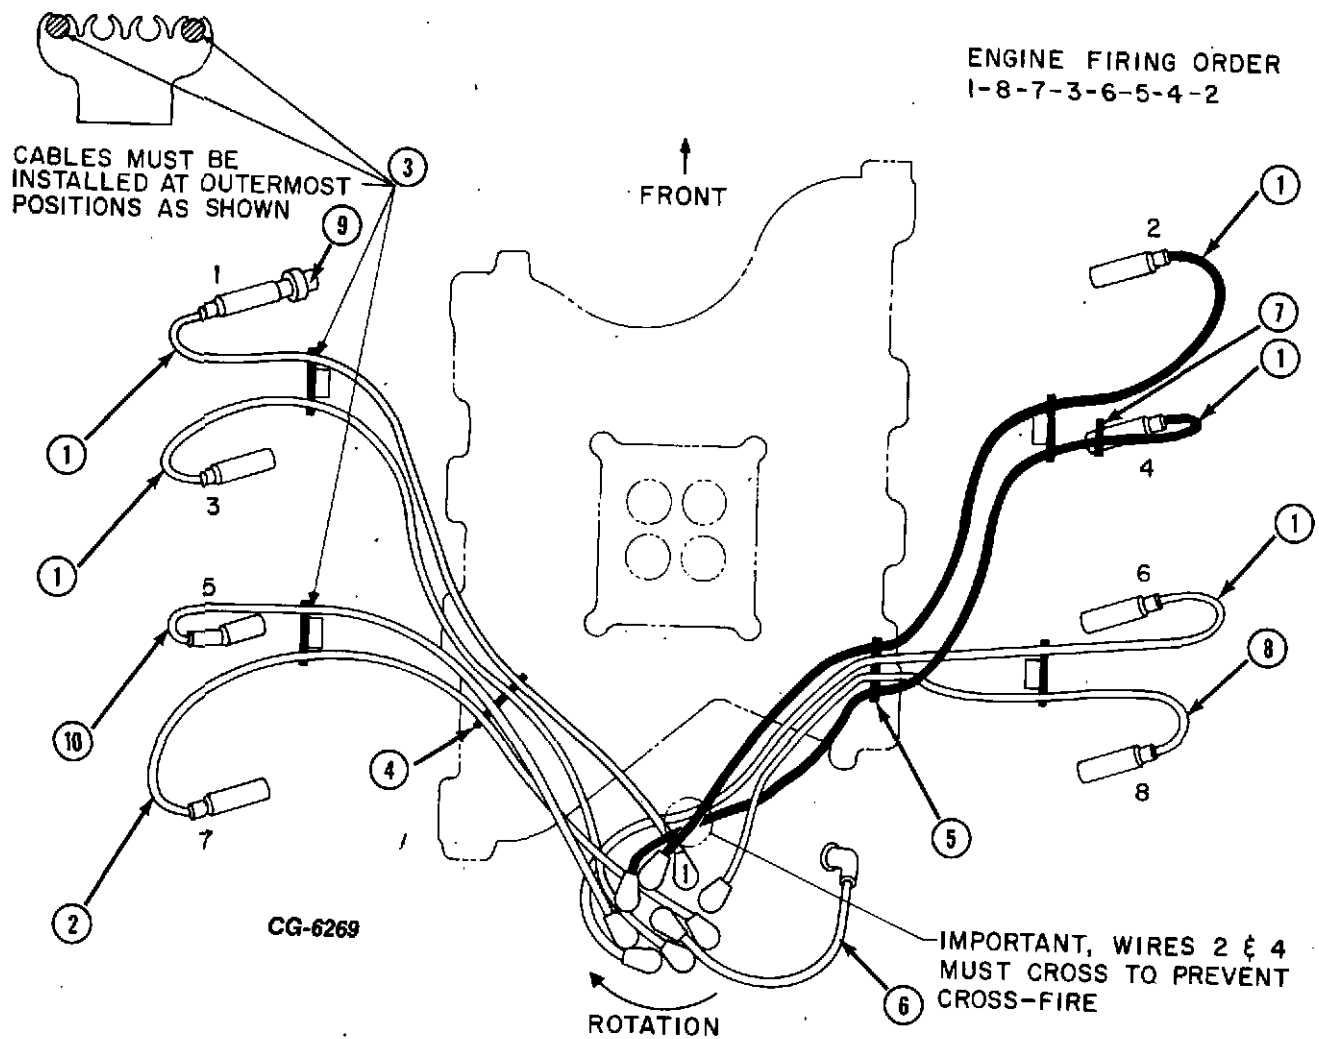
SPARK PLUG CABLE ROUTING FOR C-605 ENGINES.
